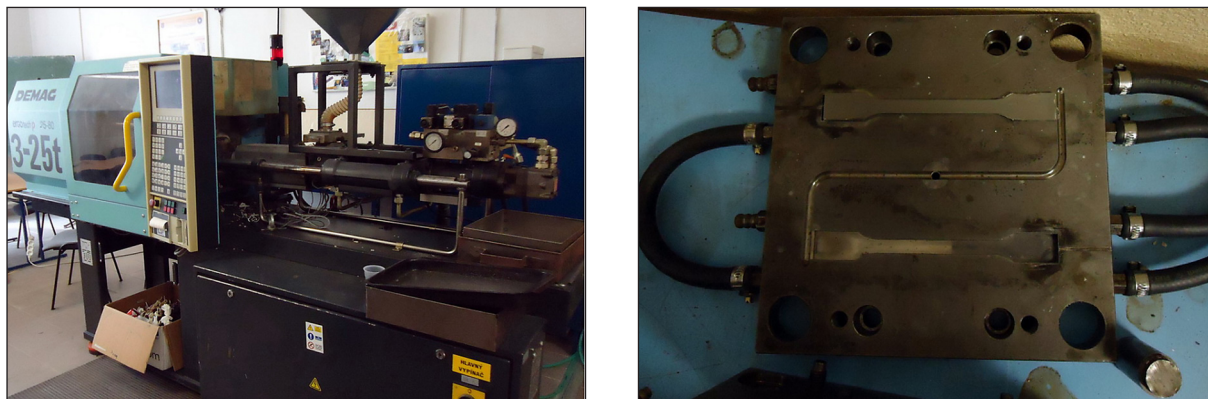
Test stand used in the experiments: a) injection molding machine Demag 3-25t, b) injection mold unit and molded specimens
